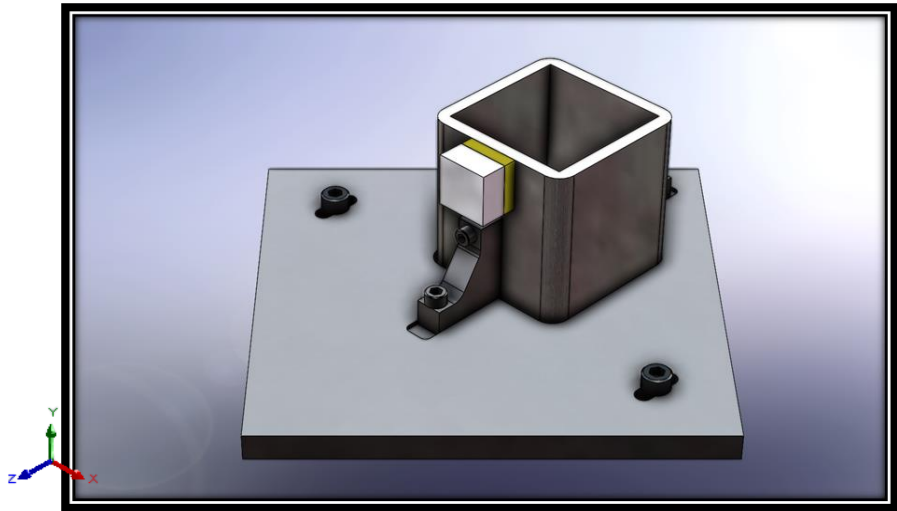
Exploded view of the metal-to-metal bonding test base.
